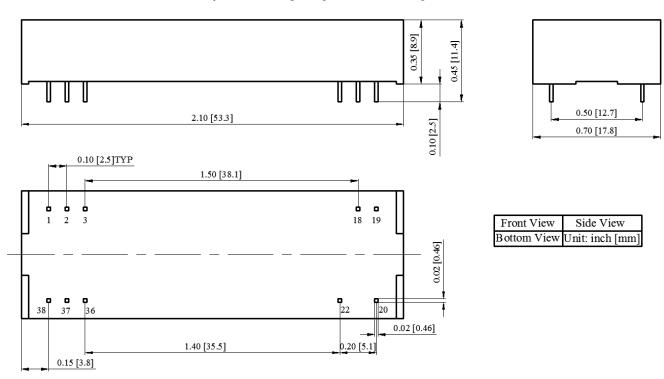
Dimensions of AD202KN (Made by ATI) DIP Package
